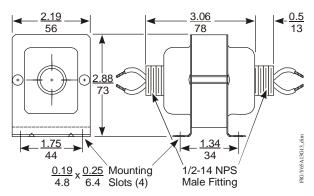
Dimensions for Y65A13 and Y65G13 Types, in./mm
